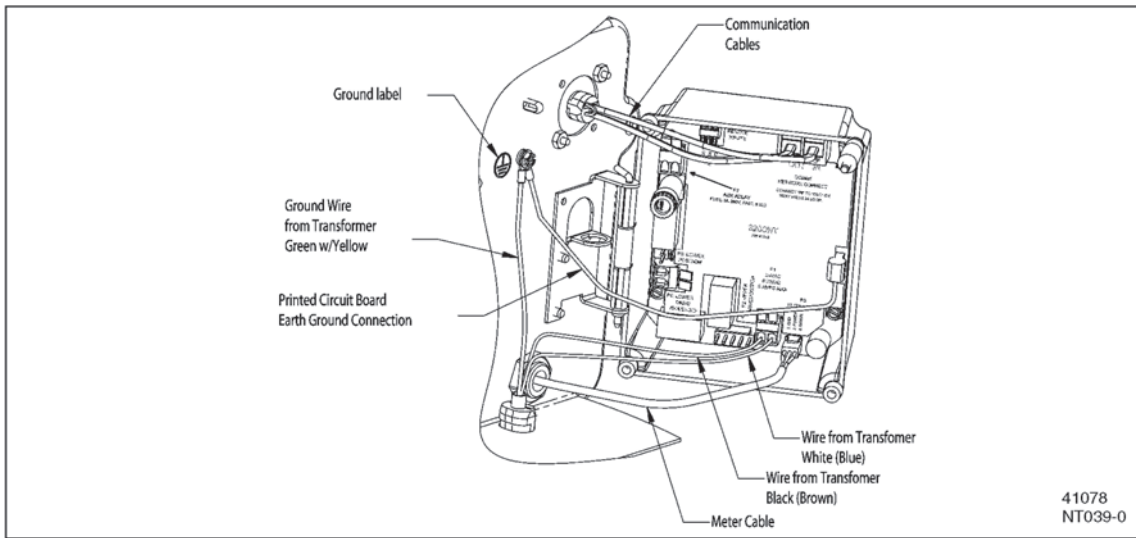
Installing Ground Wire on Transformer, 2750/2850/2900 Valves
